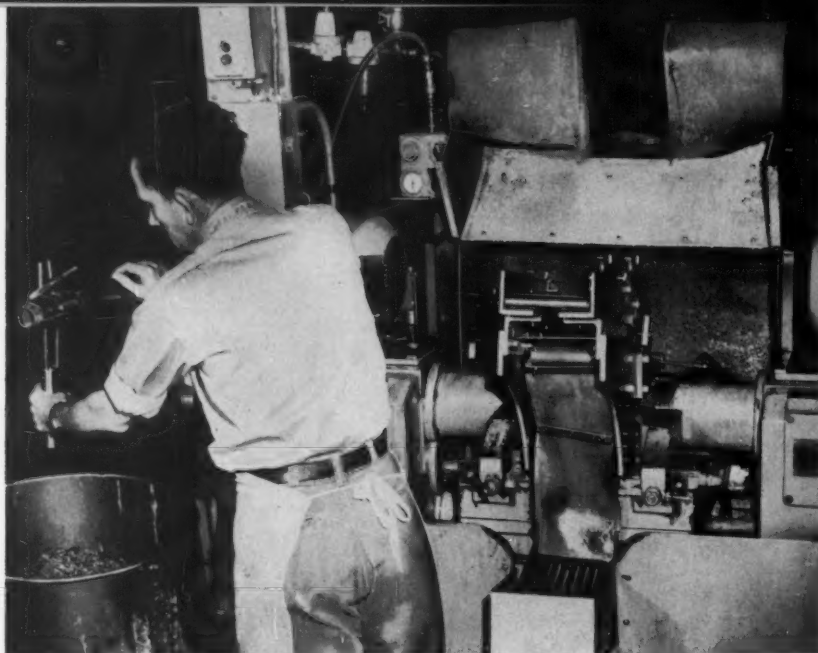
Centering machine converted for double-end boring of short tubes. Chips which are directed into the tube to avoid tool troubles are later removed by pushing the parts over vertical rods (left).
